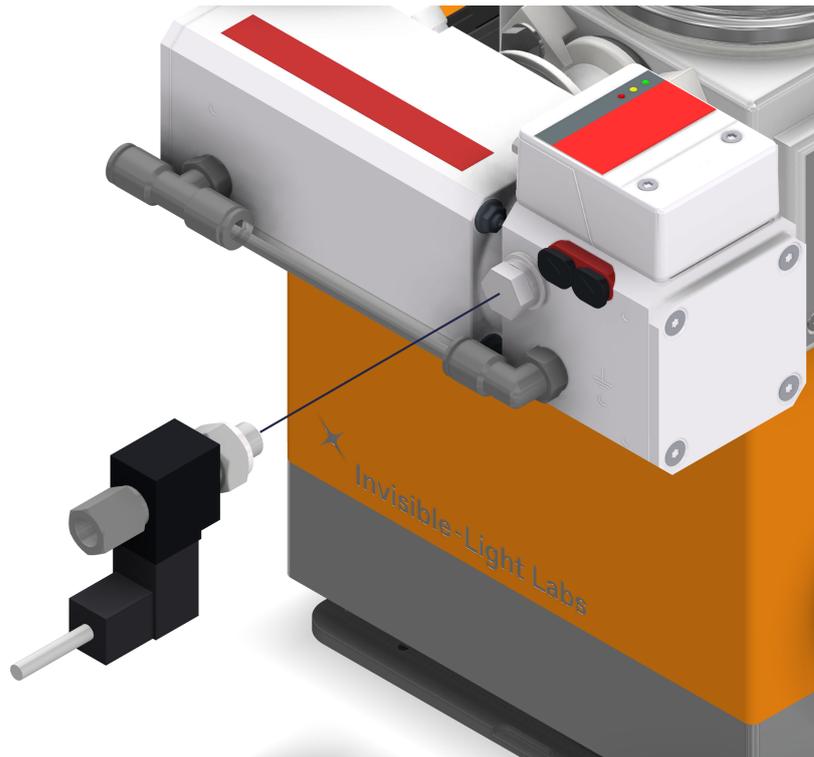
Mounting the automatic venting valve to the HiPace® 10 Neo by removing the closure of the venting opening and attaching the venting valve hand-tight using a 17 mm wrench
